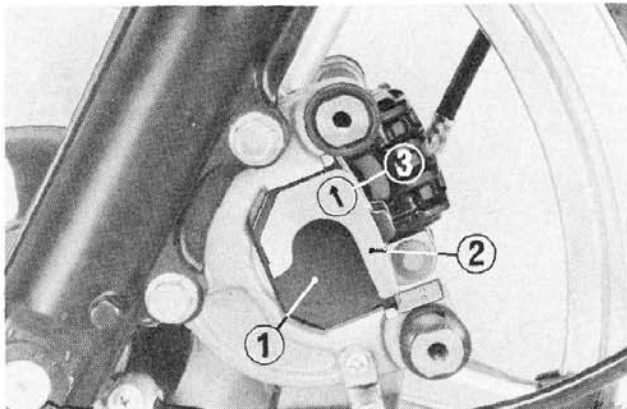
① Brake pad ② Shim ③ Arrow
